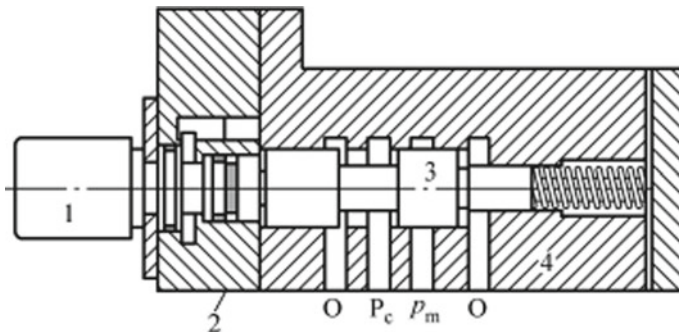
Structure of digital pressure regulator valve. 1—Electromagnetic coil, 2—PWM valve, 3—valve element, 4—bilateral throttle valve. O—drainage port, PC—oil supply port of lockup clutch, Pm—main oil circuit port
